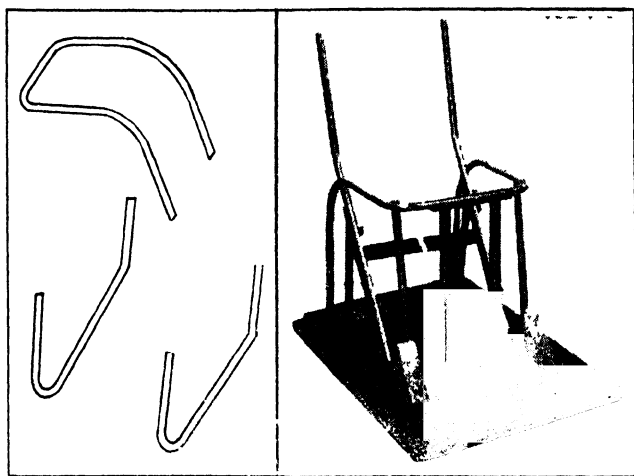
(left). Three pieces of chair frame tubing. Fig. 13. (right). Chair parts in jig.
